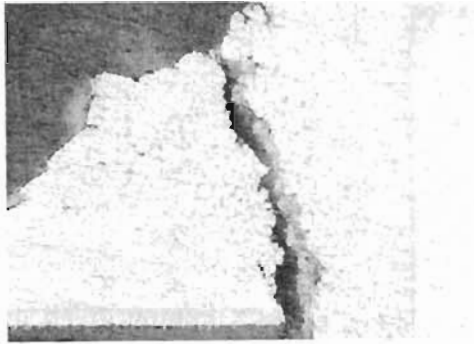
Microsection of cracked solder joint (EPS)
